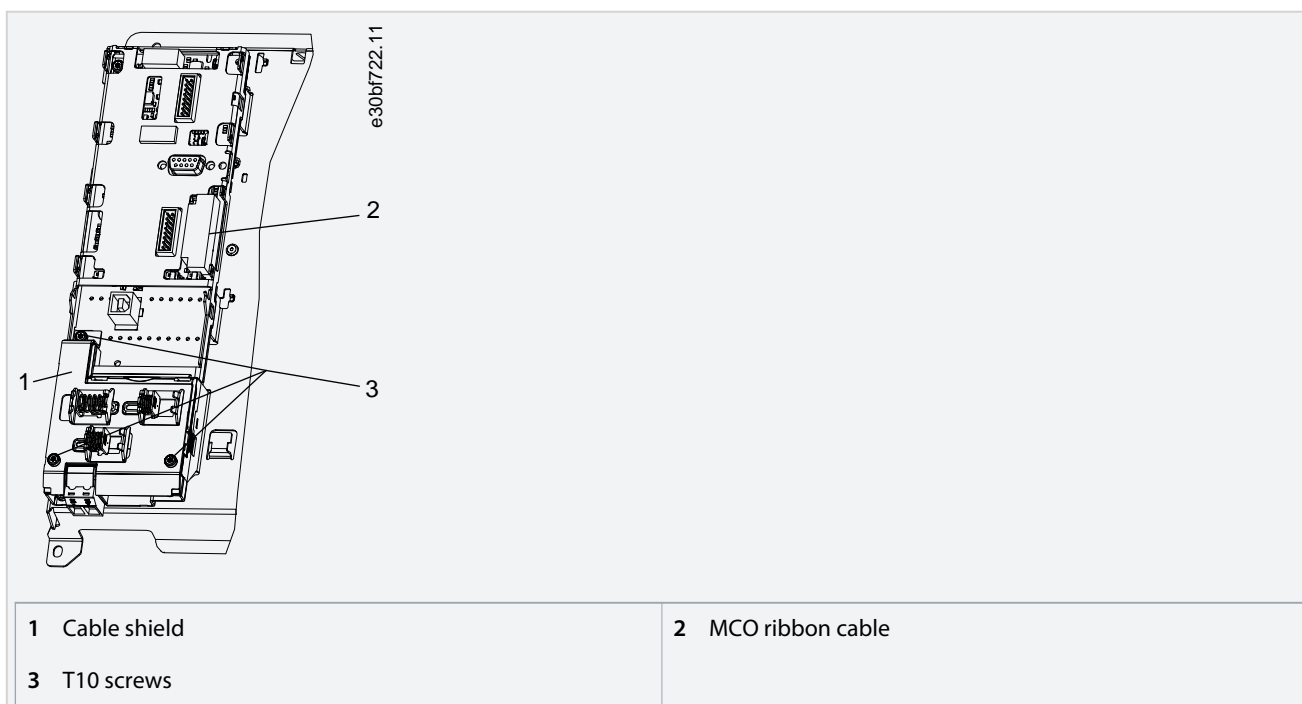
Location of Cable Shield, Screws, and MCO Ribbon Cable
